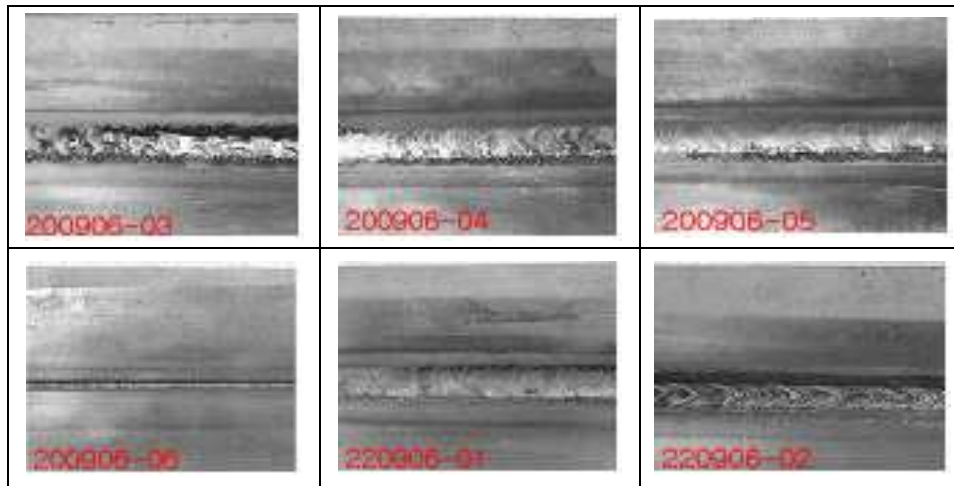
Bead shapes of fillet joints by each welding process; No.200906-03 MIG in 1000mm/min welding speed, No. 200906-04 MIG in 700mm/min welding speed, No. 200906-05 MIG in 600mm/min welding speed, No. 200906-06 Laser welding, No. 220906-01 Laser-arc hybrid welding, No. 220906-02 Arc-laser hybrid welding.
